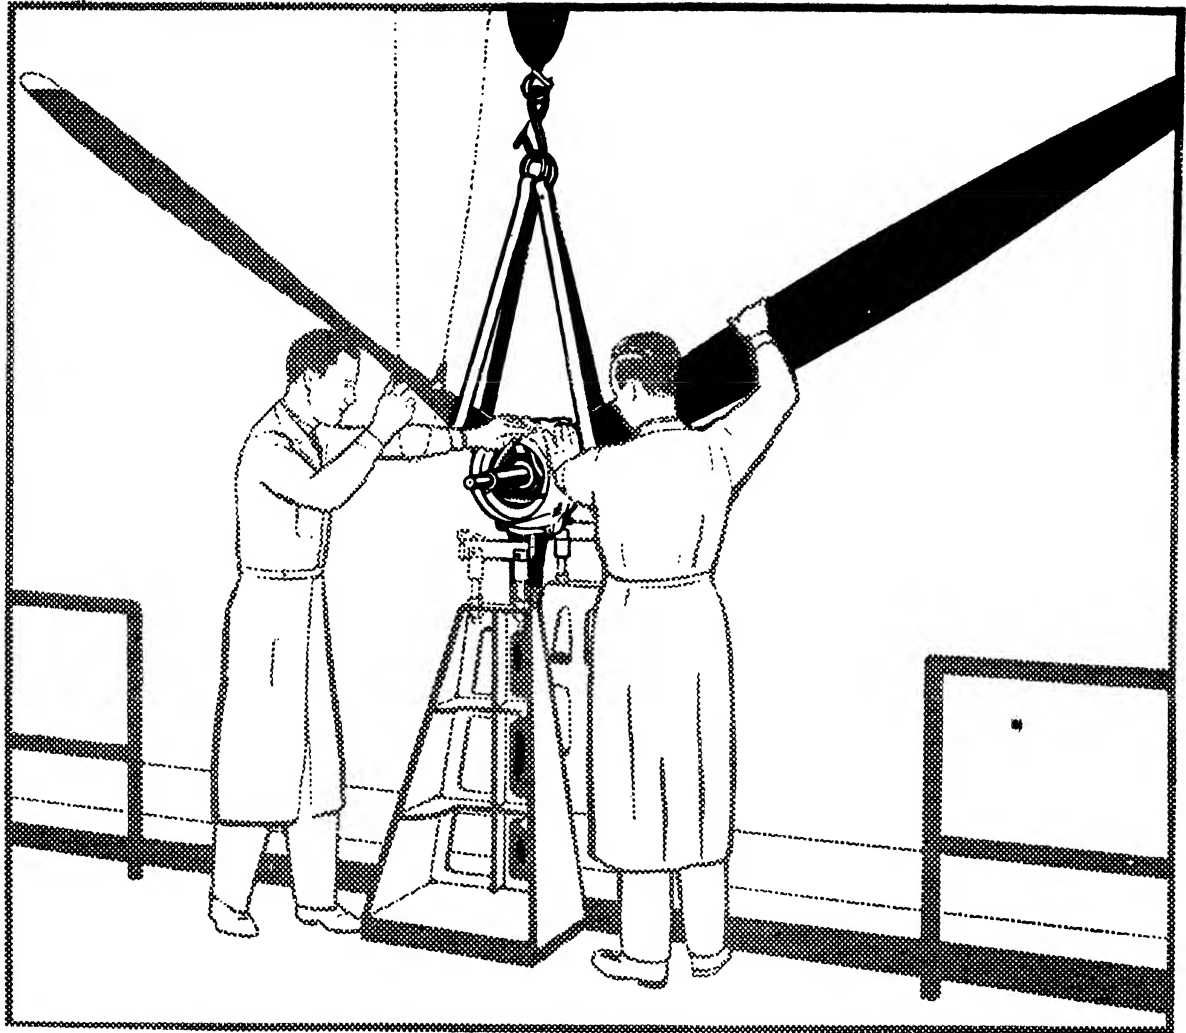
Ben Day overlay placed on print. (*Hamilton Standard Propellers.*)
